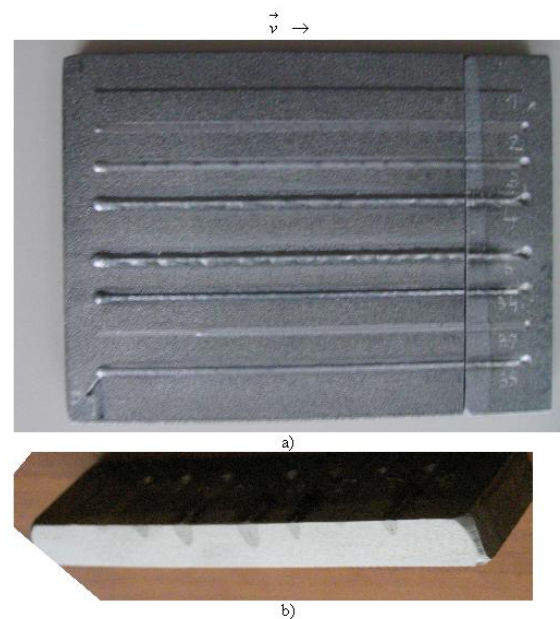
Plate with welds a) Surface plate b) cross-sections through the plate
